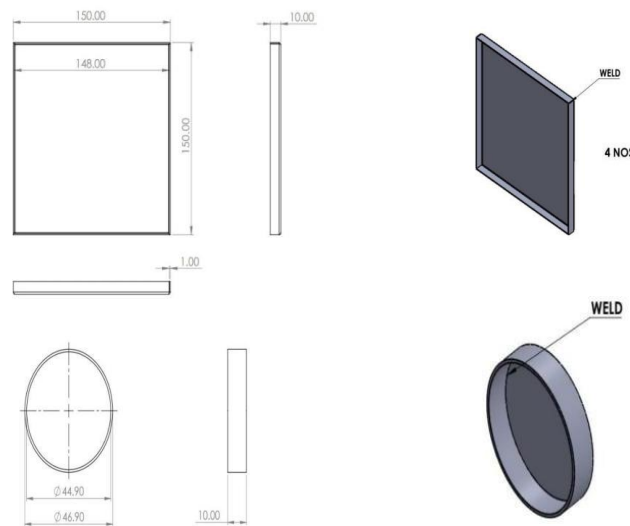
(a) Mould for square panel (b) Mould for tube impedance test
